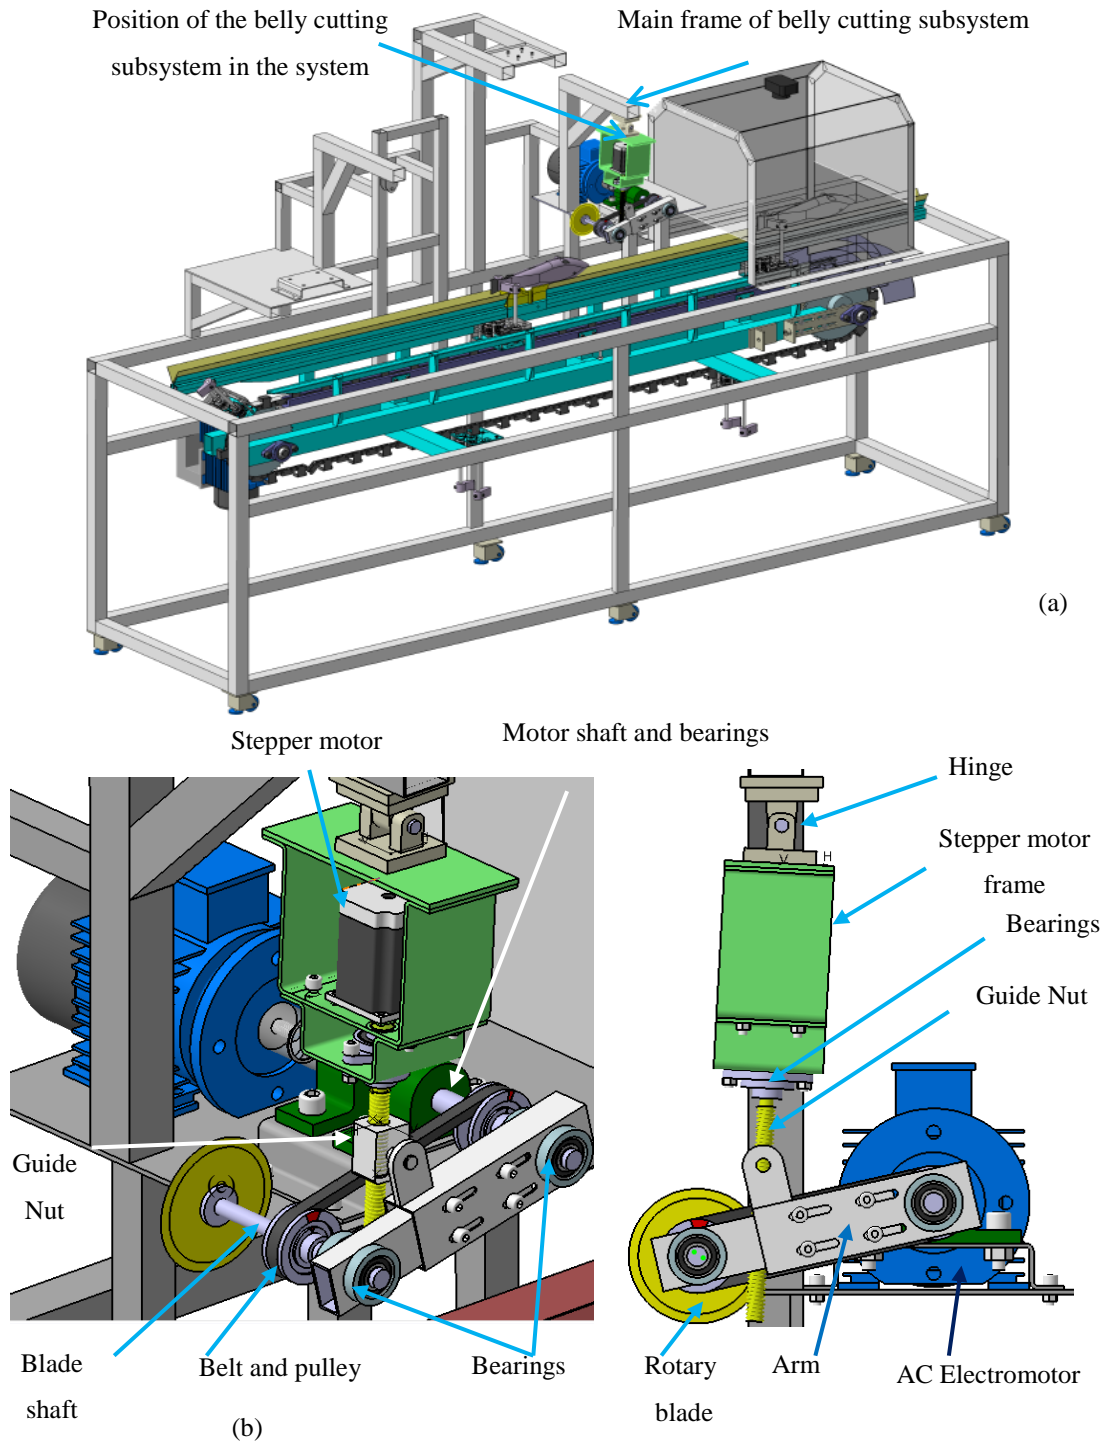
Belly cutting subsystem: a) position of the belly cutting subsystem in the system, b) belly cutting component in isometric view, and c) the belly cutting components in front view.
